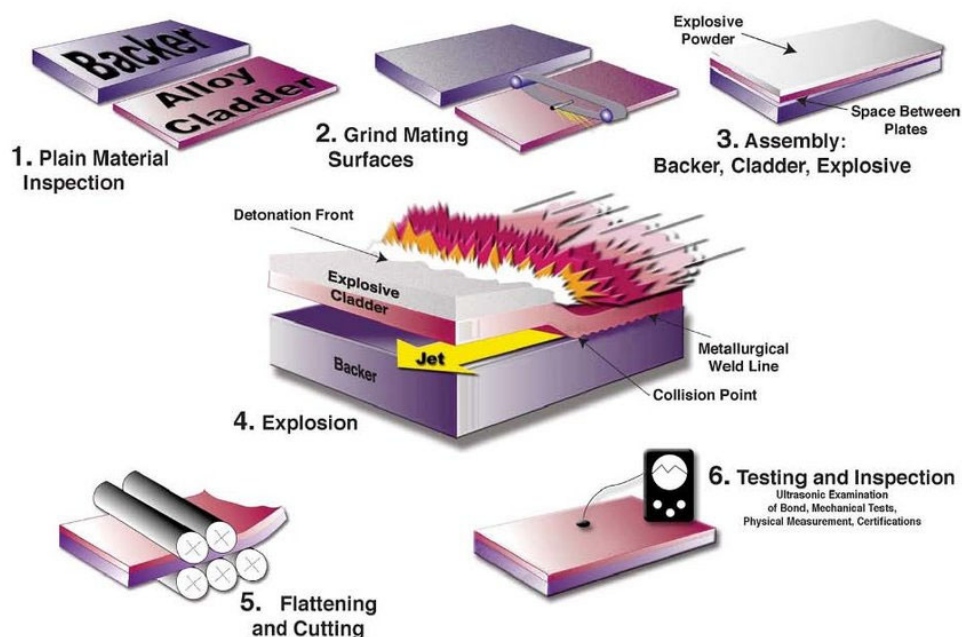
Explosion Clad Manufacturing Process (Courtesy of Nobel Clad)
